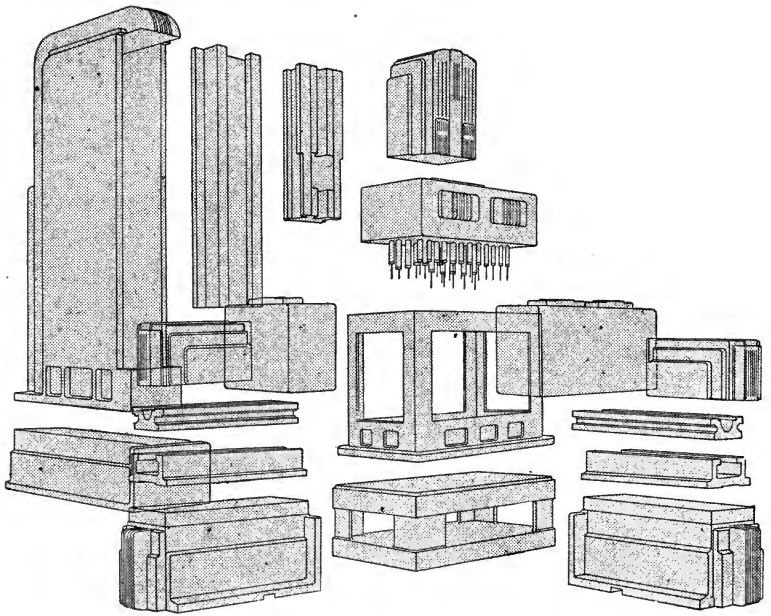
Unit-type machine showing how a machine for a special purpose can be made from a number of standard units. (Courtesy of The Ingersoll Milling Machine Company.)
